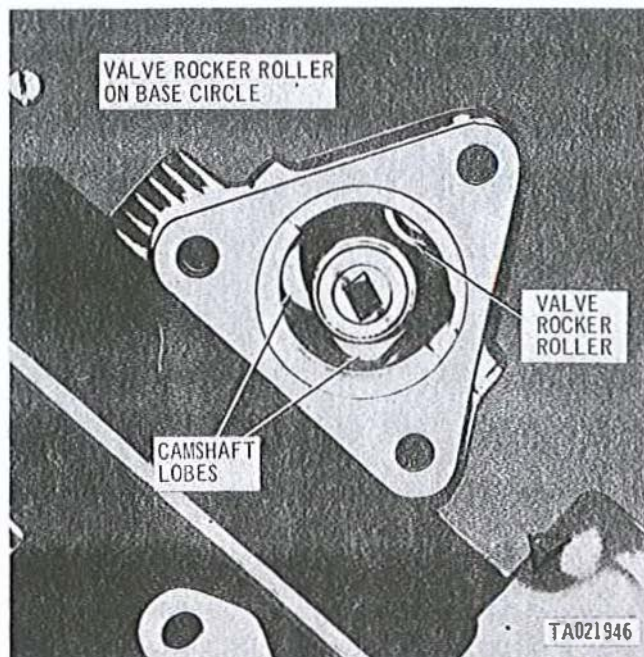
Correct position of camshaft lobes on 1R cylinder for injection pump timing.
